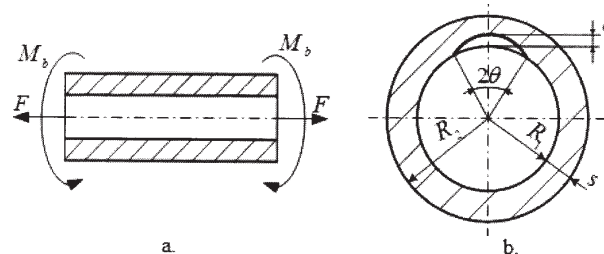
a - Load group comprising axial tensile force, F , and bending moment M_b ; b - tube specimen section with circumferential semielliptical crack on the inner surface.
